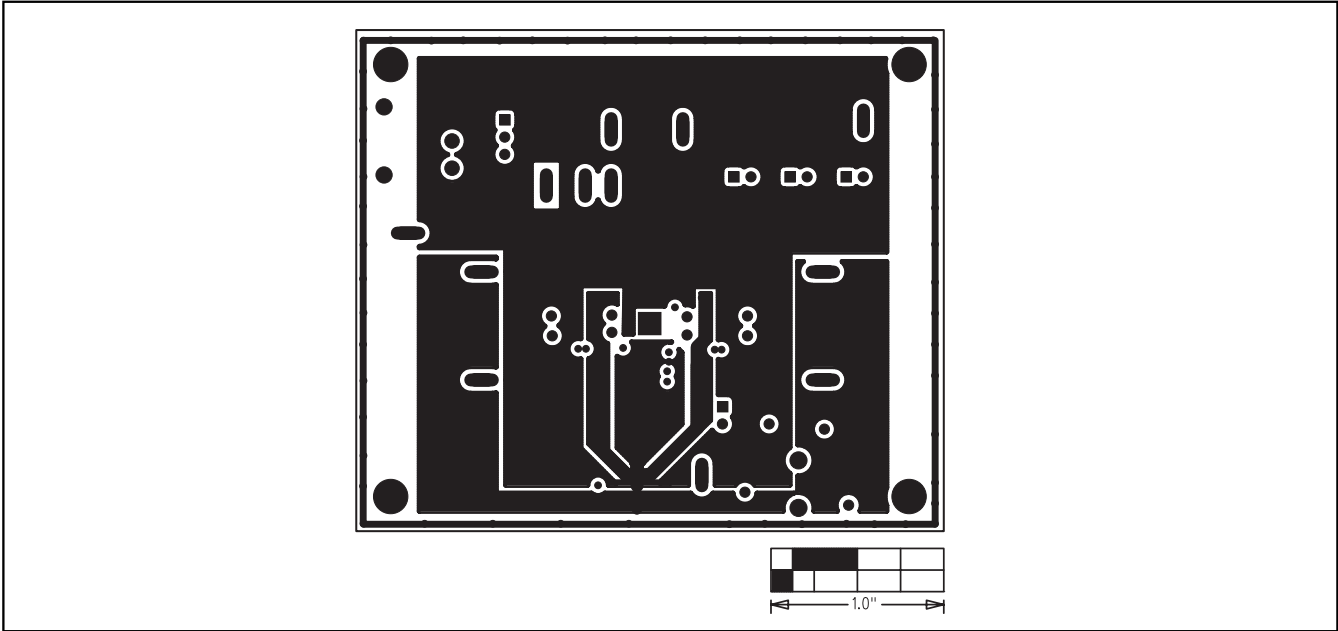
MAX9752A EV Kit PC Board Layout—GND Layer 2
